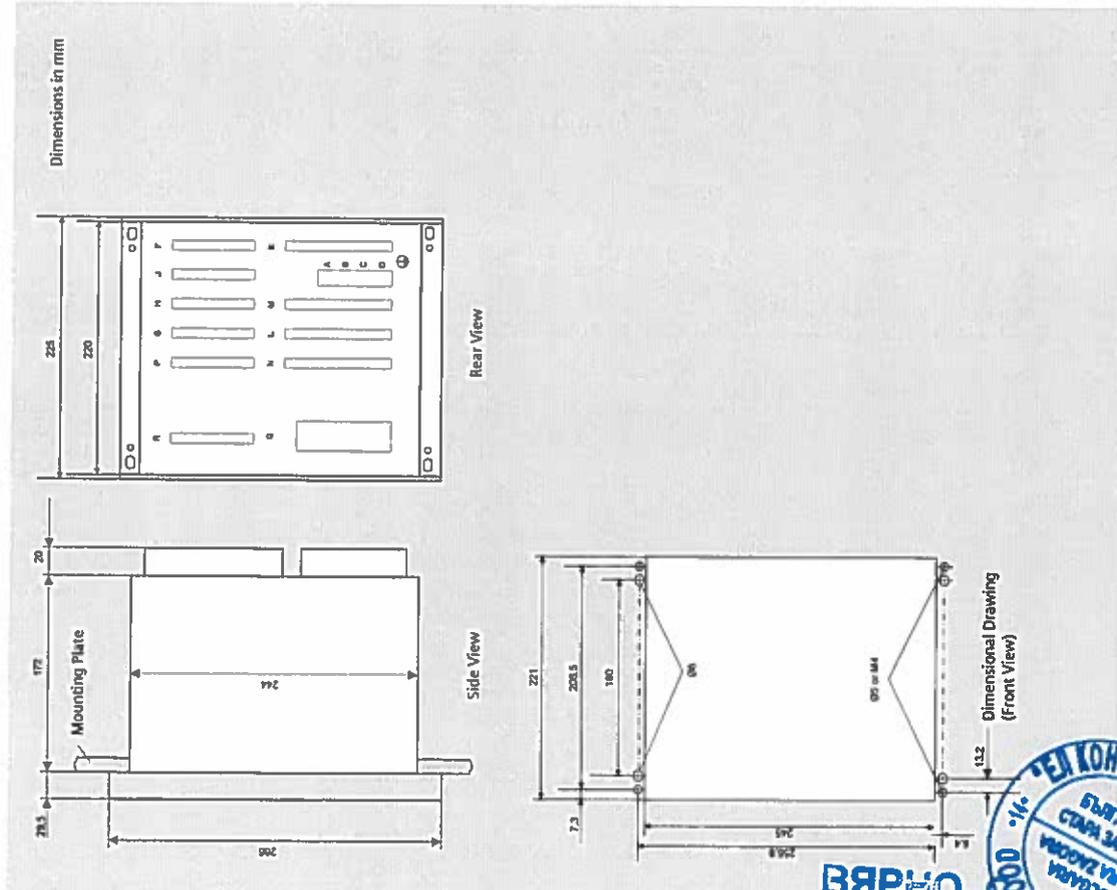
Dimensional drawing for SIPROTEC 7SJ66 (housing size 113)
